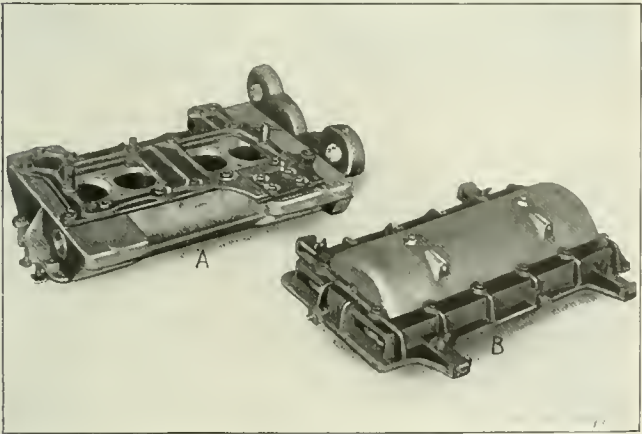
Drilling Jigs for Upper and Lower Crank Case
